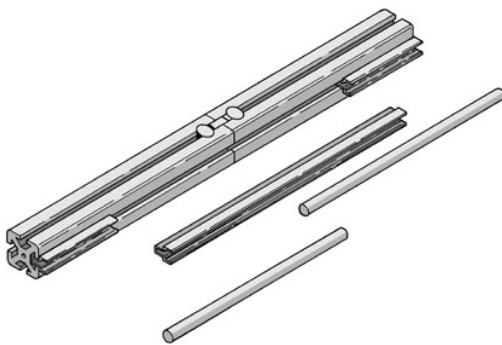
Fig. X.tif: by shifted joints of basic profiles and Shaft Clamp Profiles the linear guide can be made in any length
